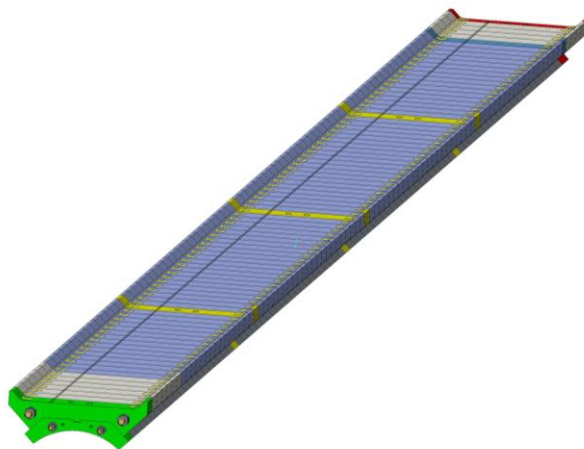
Full-length load pad-collar assembly. The lighter colored ends of the load pads are SST instead of ARMCO Pure Iron.
